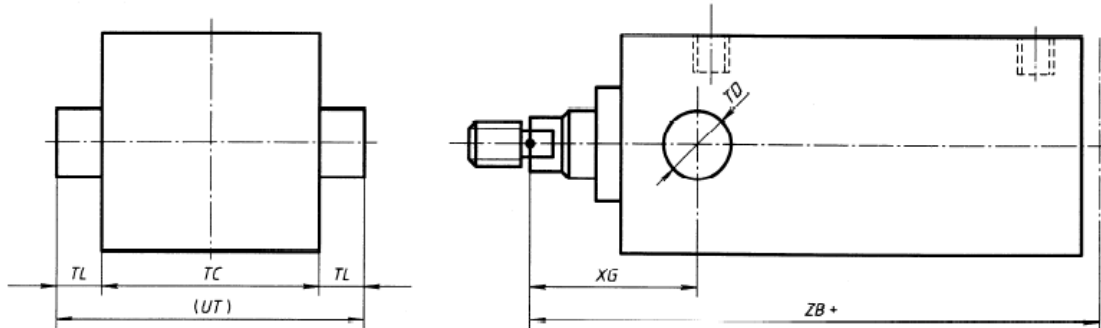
MT1 — Head mounting, integral trunnion (male)
